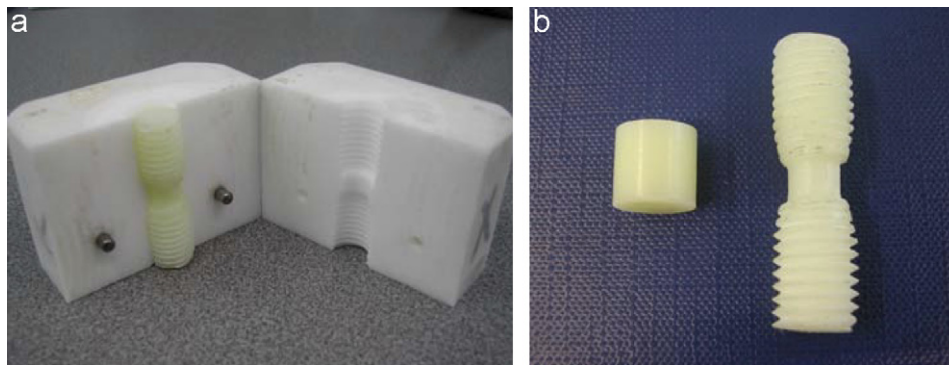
Mould for tensile specimens (a) and example of compression and tensile specimen (b).
